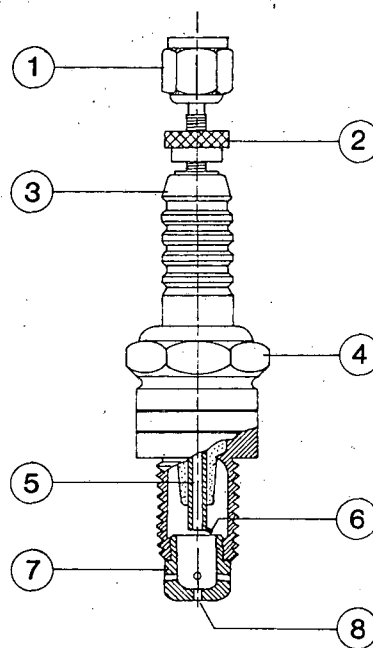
Flame, or hot gas, jet igniter: 1-tube fitting, 2-high voltage terminal, 3-insulator, 4-plug body, 5-nickel tube, 6-electrode, 7-injector tip, 8-discharge port. (XBL 881-303)
